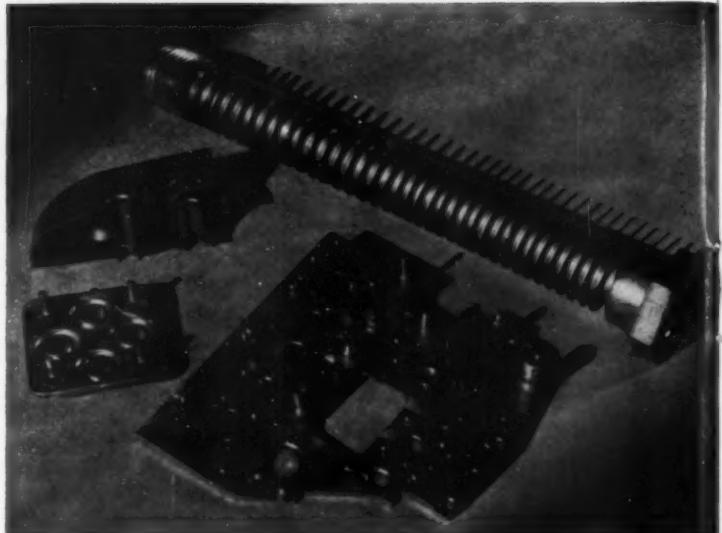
A group of furnace-brazed assemblies indicating the complexity of design possible
